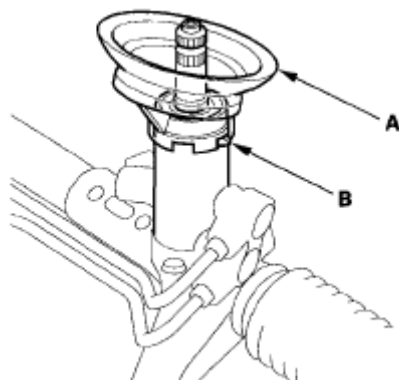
Identifying Slot In Pinion Shaft Grommet With Lug Portion
